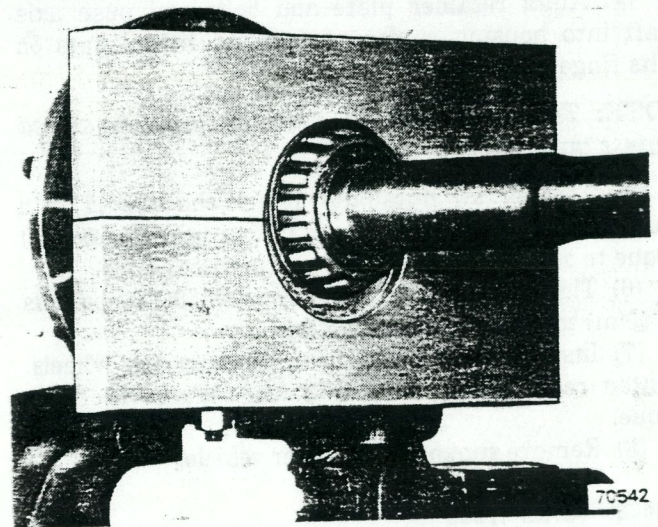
F-26 Axle Shaft Bearing Removal—Cherokee-Wagoneer-J-10 Truck Axle
